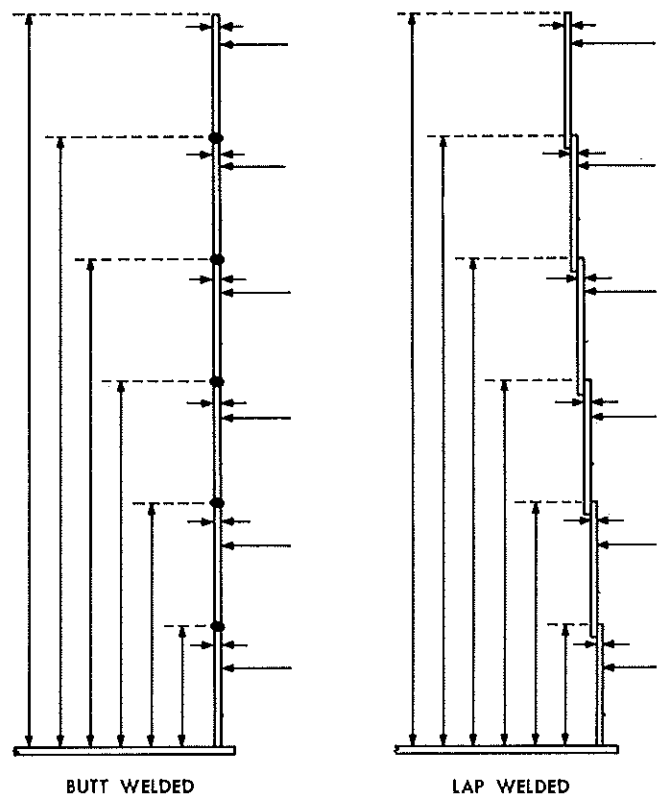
EXAMPLE OF RECORD FORM FOR MEASUREMENT OF UPRIGHT TANK SHELL, BUTT- AND LAP-WELDED.
